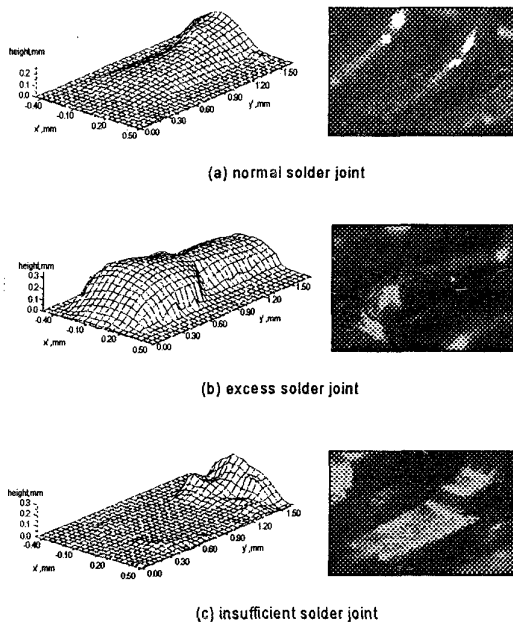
Recovered three dimensional shape of the SOP solder joints
